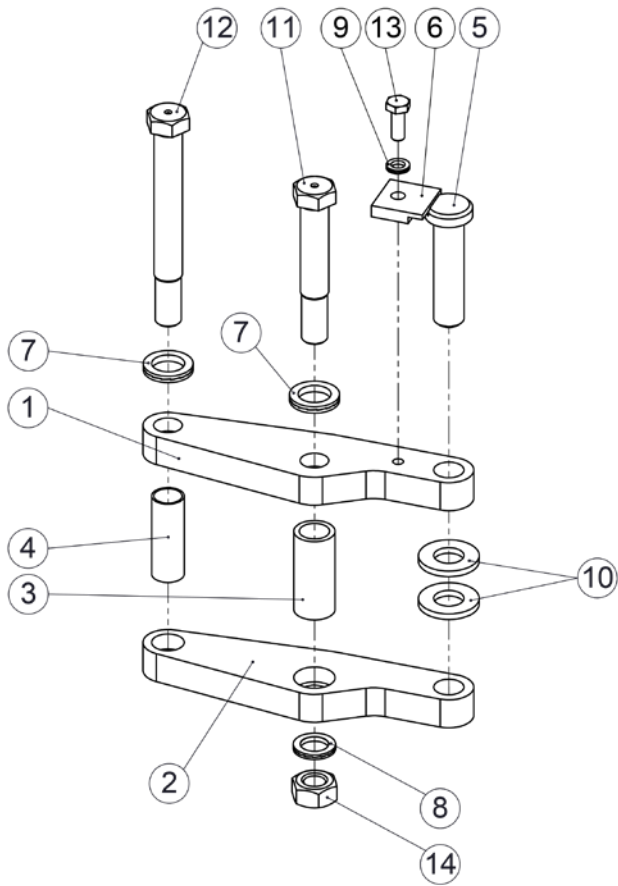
688055 Latch Mechanism Assembly for AMP®-1250/1
